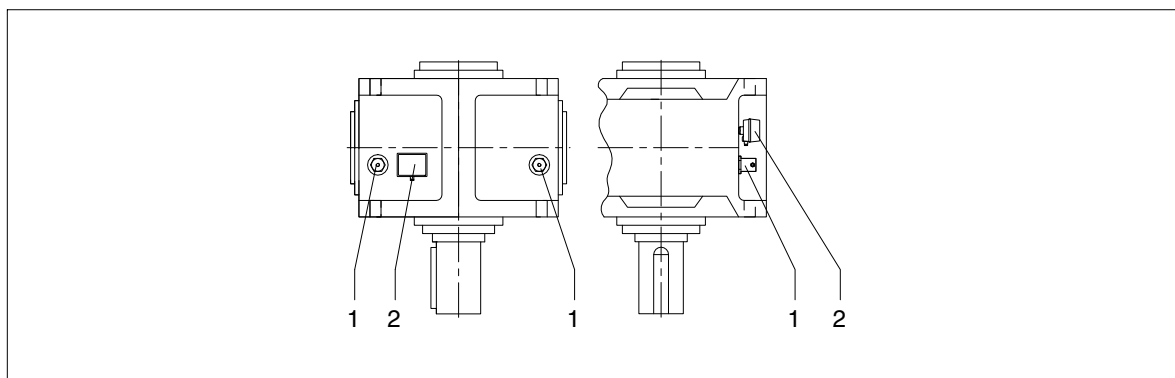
Heating on gear units without oil-equalising tank of types H..V and B..V
